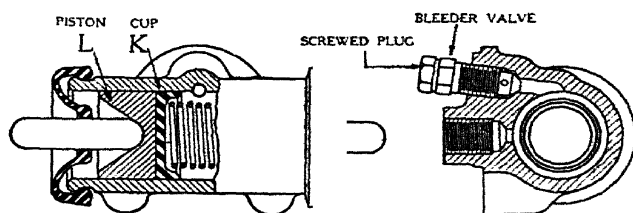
Brake-Operating Pistons and Bleeder Valve.
